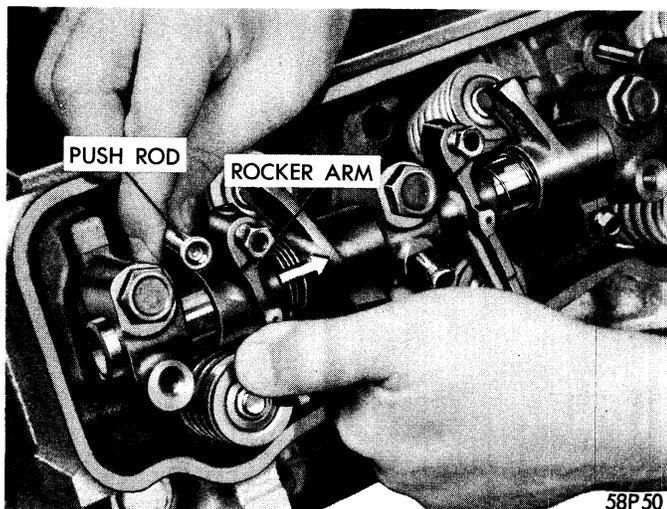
Removing Push Rods from V-8 Engine—277, 301 and 318 Cubic Inch Engine
